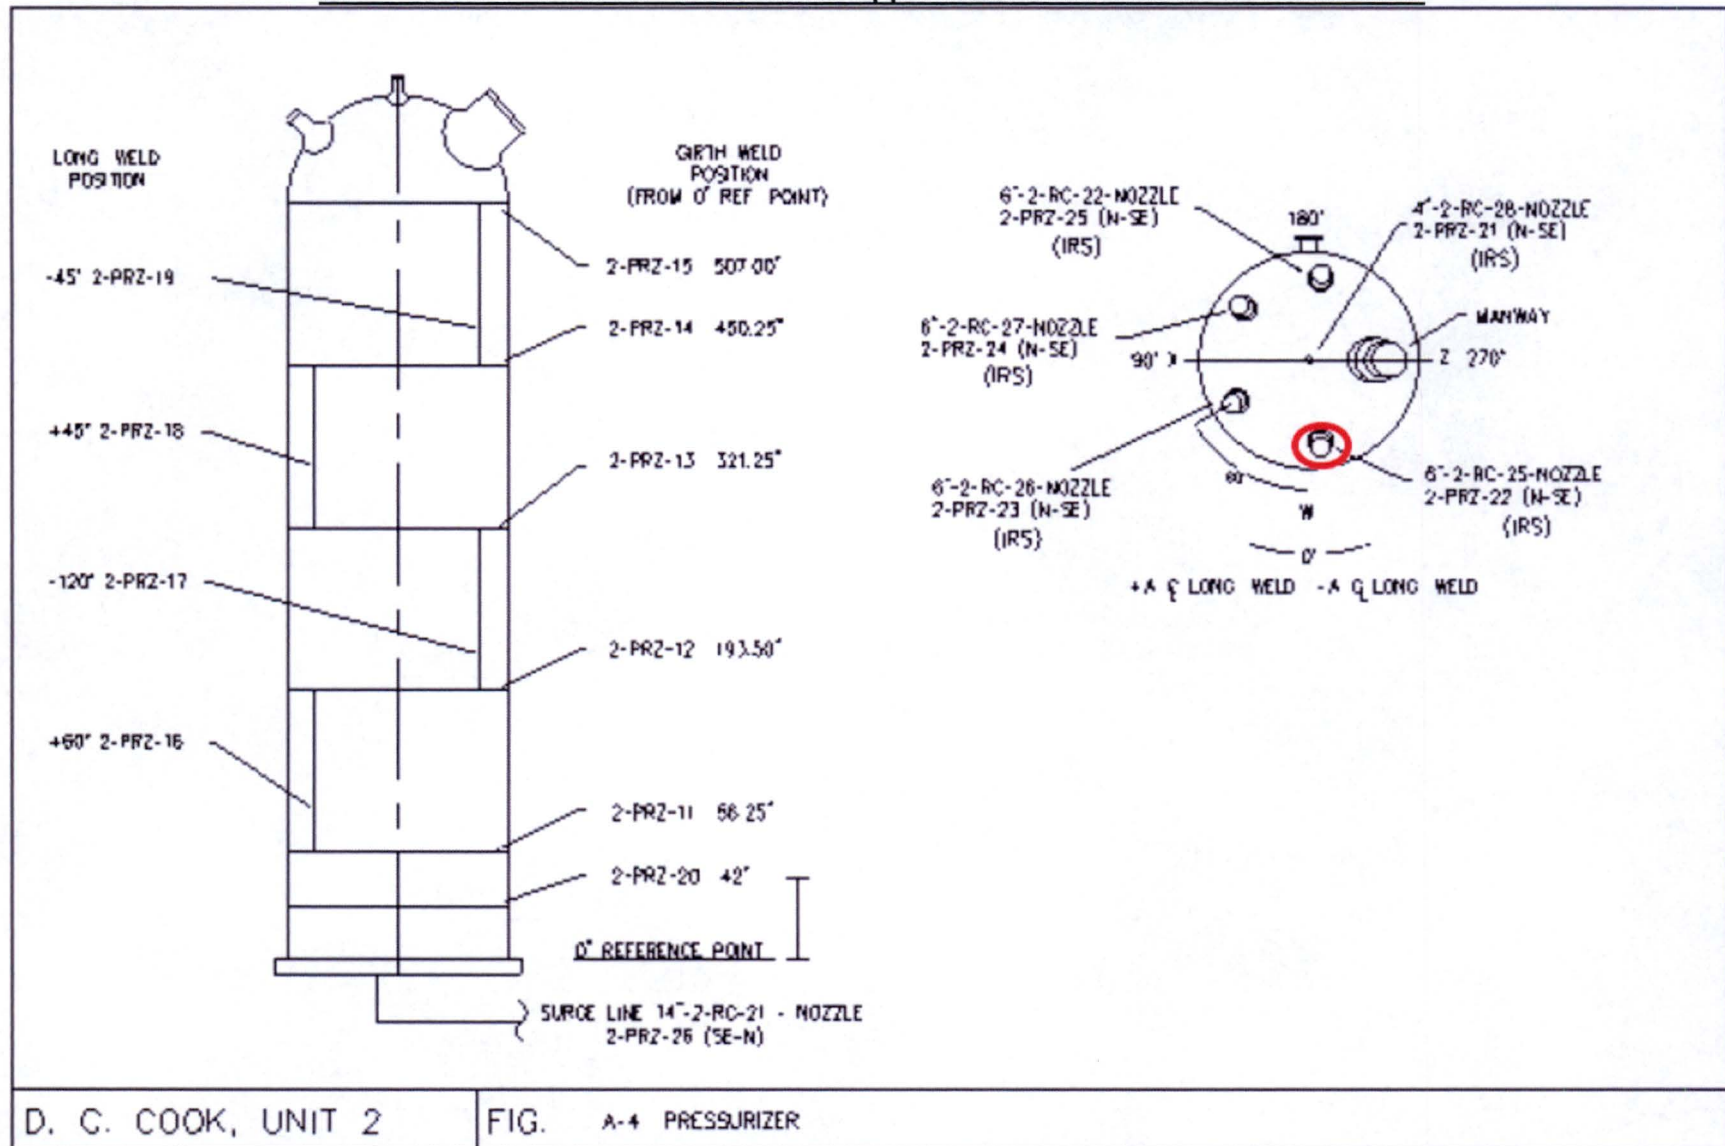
Weld 6"-2-RC-25 (Extracted from Reference DRAWING 2A-4)
